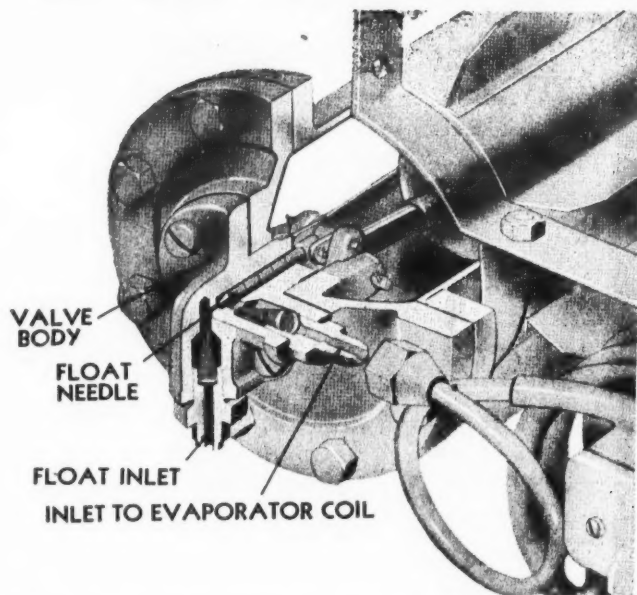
Float needle valve assembly. With this design, the liquid entering the opening at the float needle is first passed in the tube marked inlet to the evaporator. This system was used by Servel.
